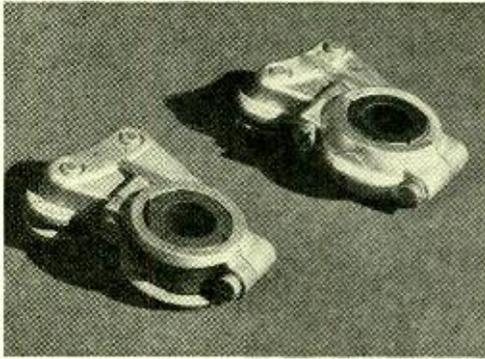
A new bearing for vertical drive shafts of selector frames has a rectangular opening in its cap (left) to provide flexibility which prevents it from distorting the bushing. The rigid cap (right), formerly used, sometimes caused the relatively soft bushing to bind onto the shaft
